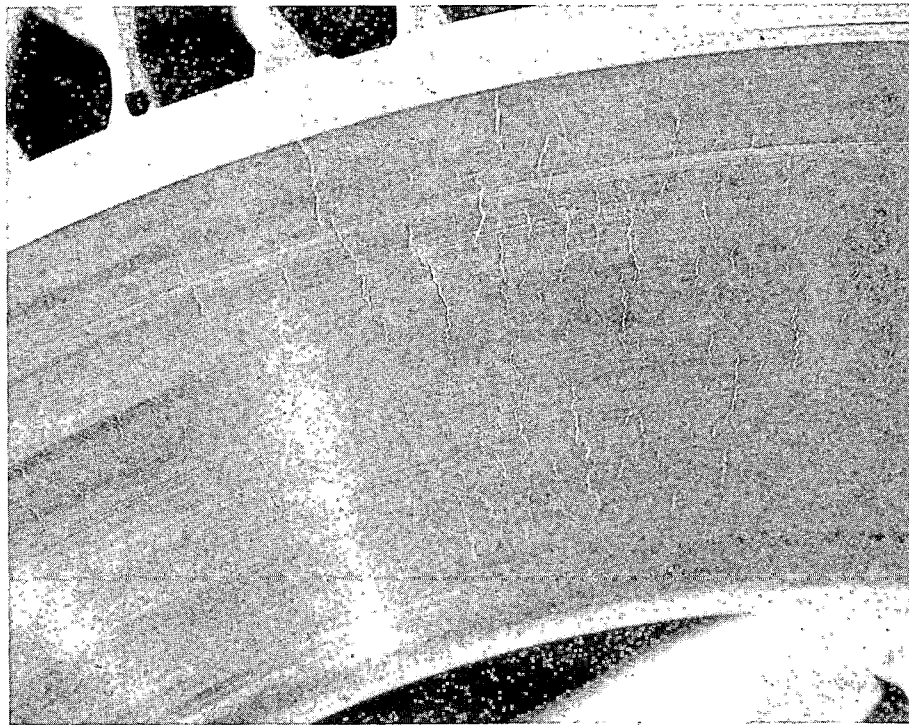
R-2 DISC BRAKE ROTOR; MULTIPLE THERMAL CRACKS.
